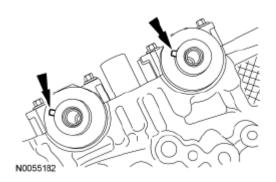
Identifying Camshafts Neutral Position Courtesy of FORD MOTOR CO.
